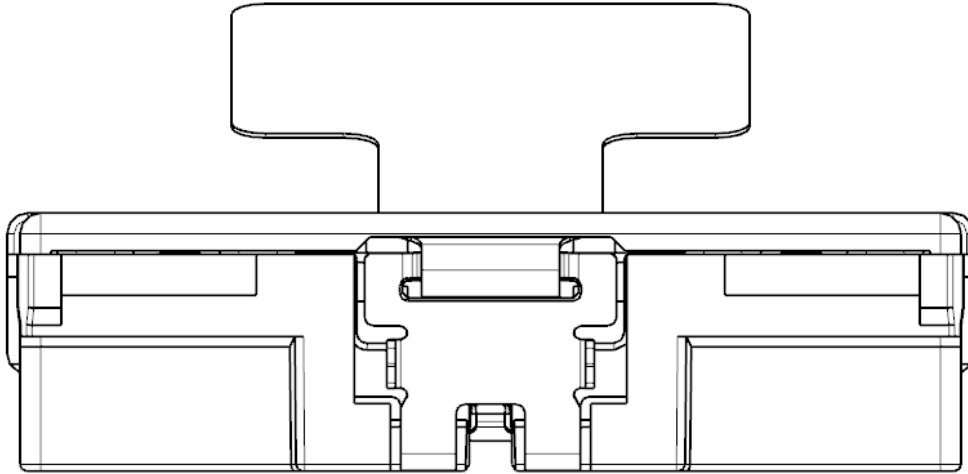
Right Angle Cable Exit & Pull-Tab
